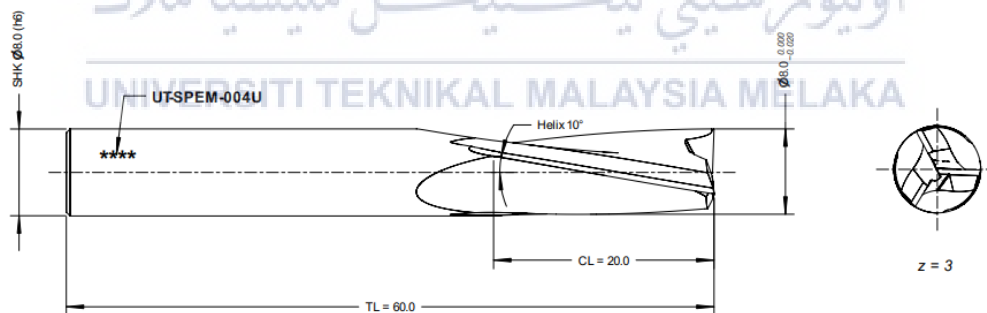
Drawing of end mill carbide with diameter 8mm, 3 flutes and helix angle 10°
